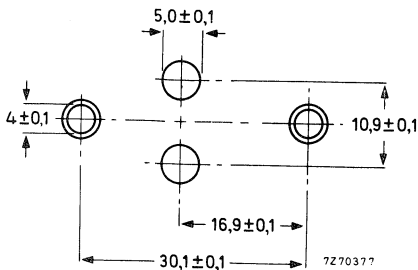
Hole pattern for 500 V insulation, nut fastening.
